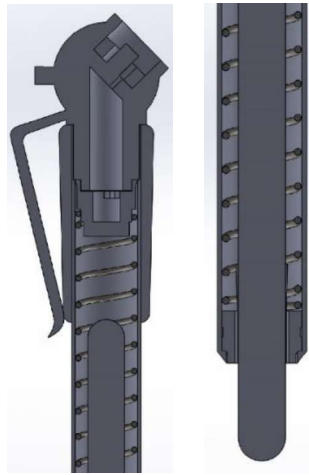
Cross-sectional view of assembled pressure gauge with all fits about the barrel
